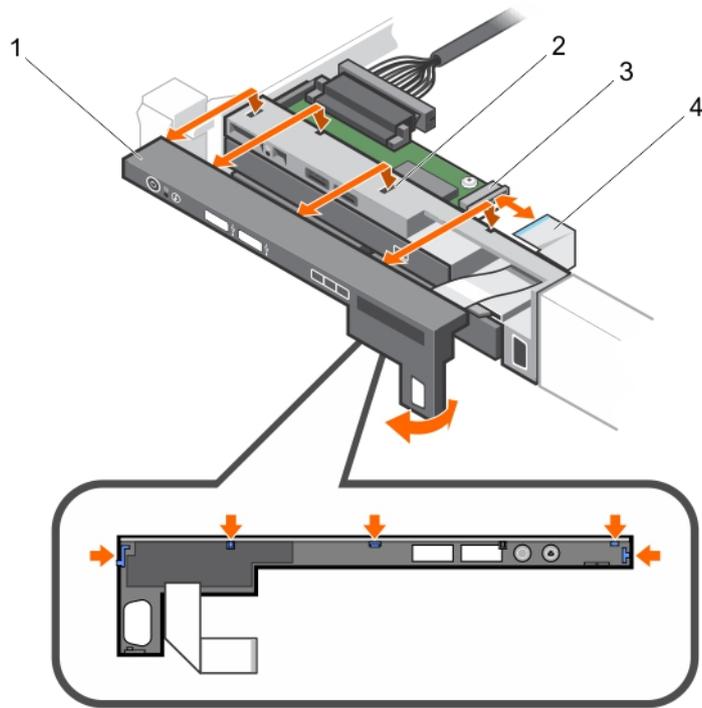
Removing and installing the control panel—eight 2.5 inch hard-drives/SSDs chassis
